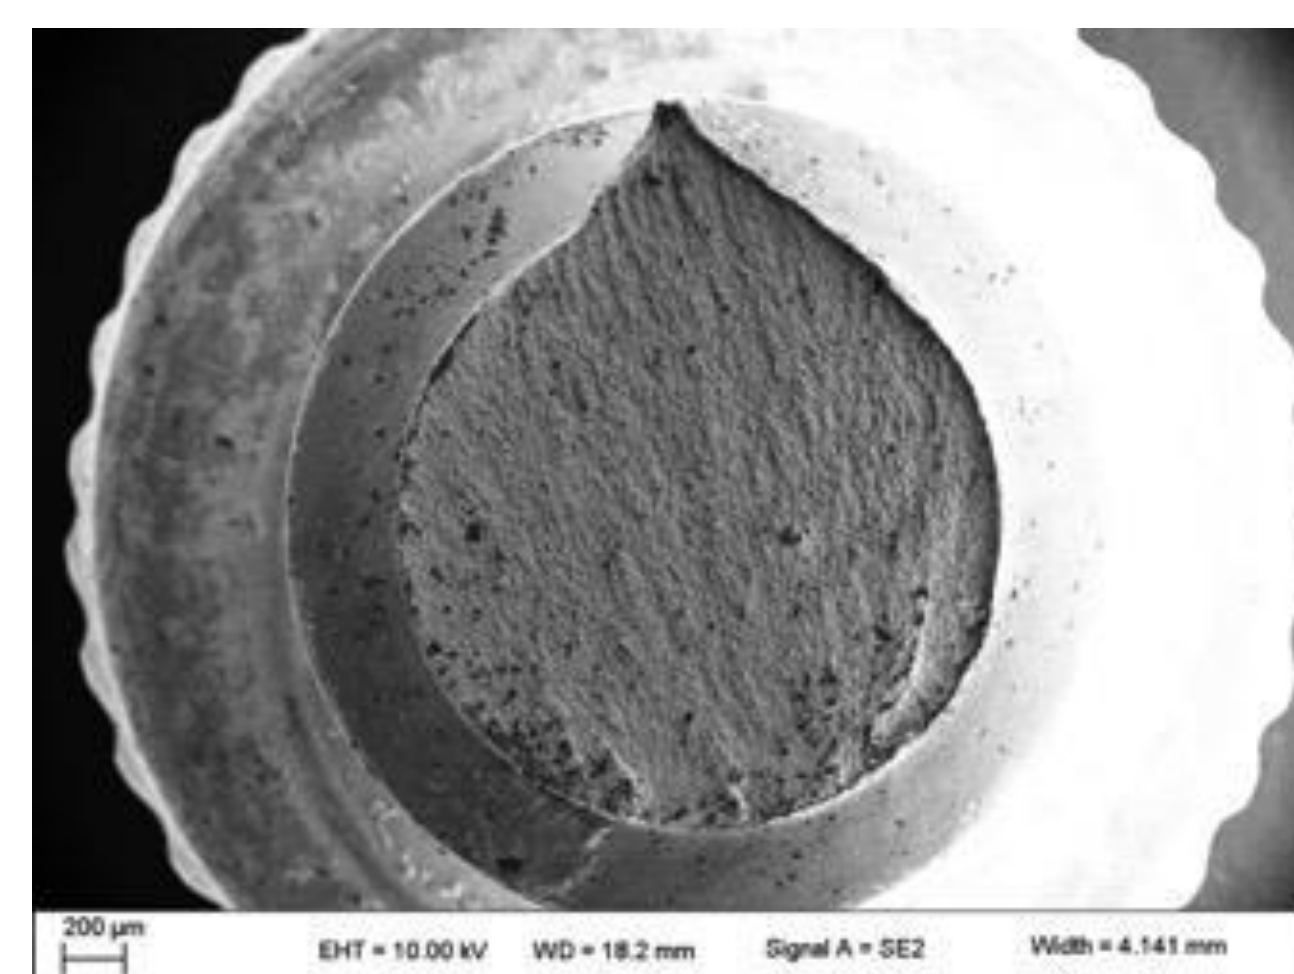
SEM Micrograph of screw head side of the fracture surface.
